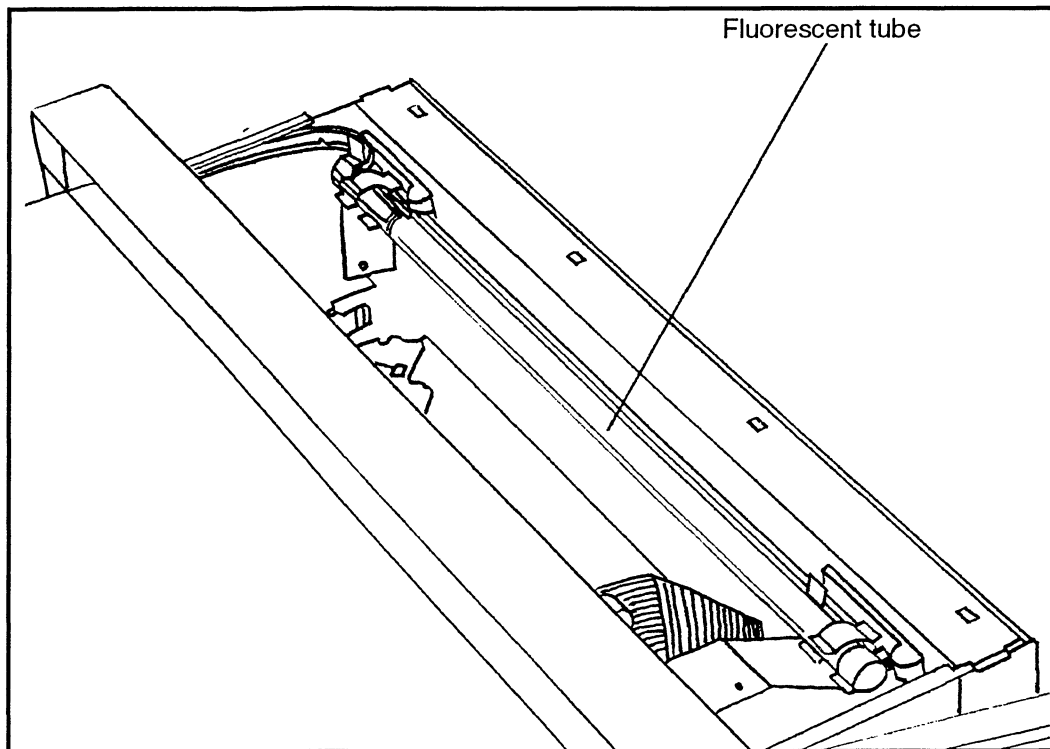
Rear of M.M.I. showing fluorescent tube assembly
